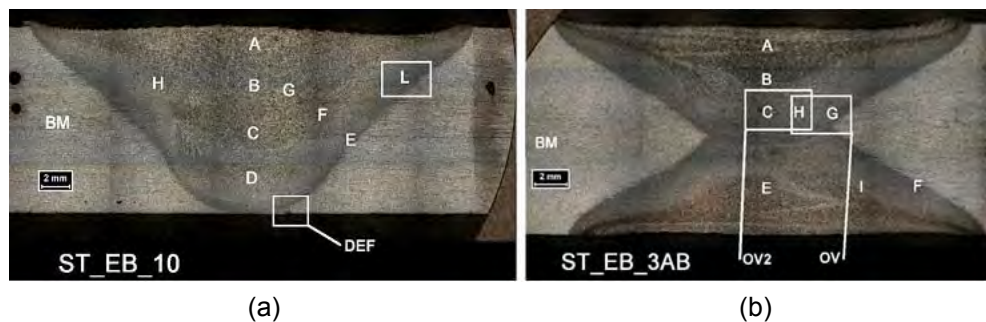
Macrograph of a single pass weld (a) and a double pass weld (b)
